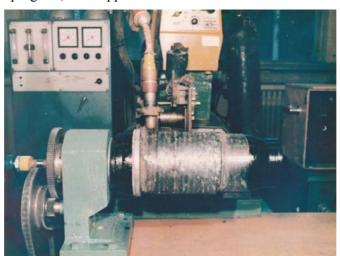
External refurbishing installation of the worn-out tool joints from the drill pipes, using hardfacing by welding
